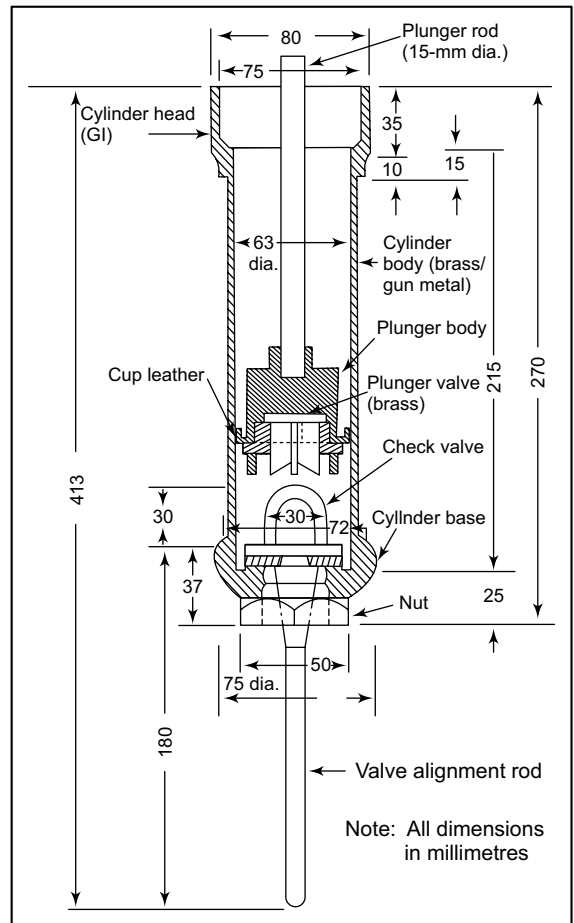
Sectional view of the cylinder and plunger of the deep well lift pump shown in Fig. 8.31
